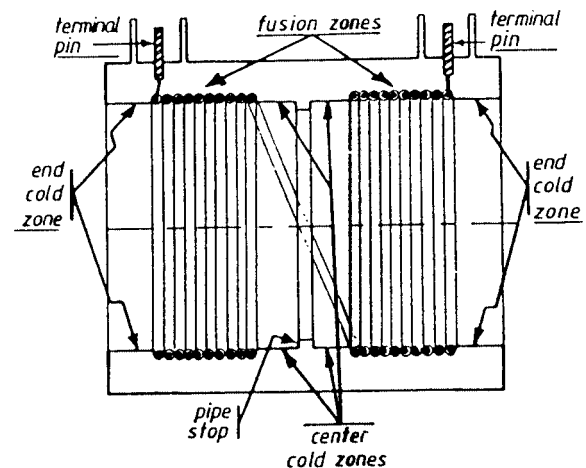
Design of an electrofusion coupler. The heating element is located in the two fusion zones, separated by two cold zones at the center of the coupler; two more cold zones are on either end of the coupler. Cold zones prevent melt from extruding out of the joint, and pipe stops provide for control of the weld displacement. Current is generated by connecting terminal pins to an electrical source.
